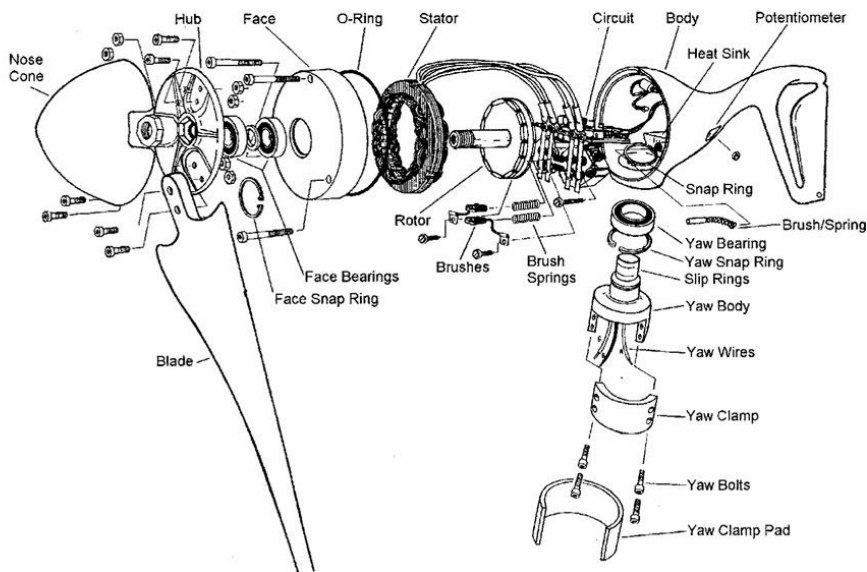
B. The operating dimensions and an exploded drawing of the
